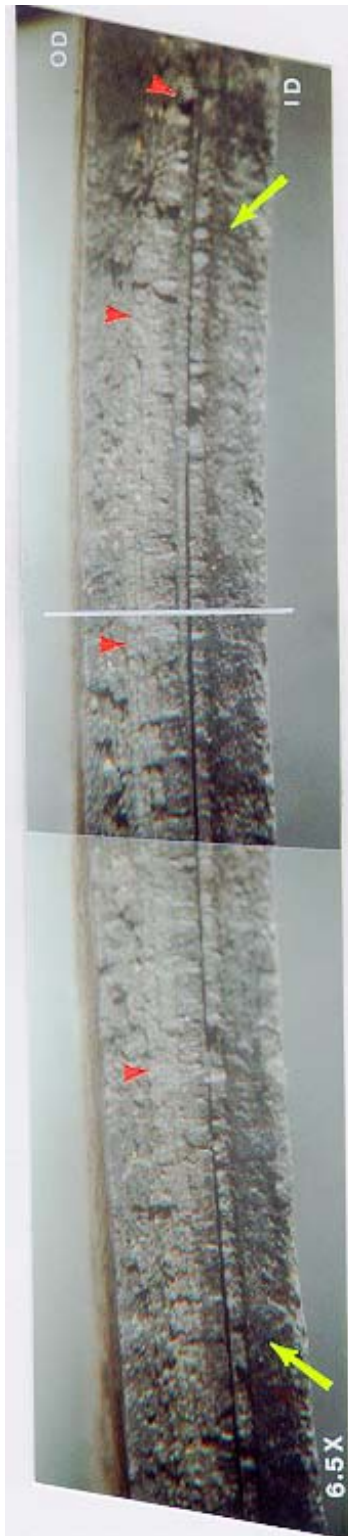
Fracture Surfaces of Fatigue Case Number 8 Anomaly
